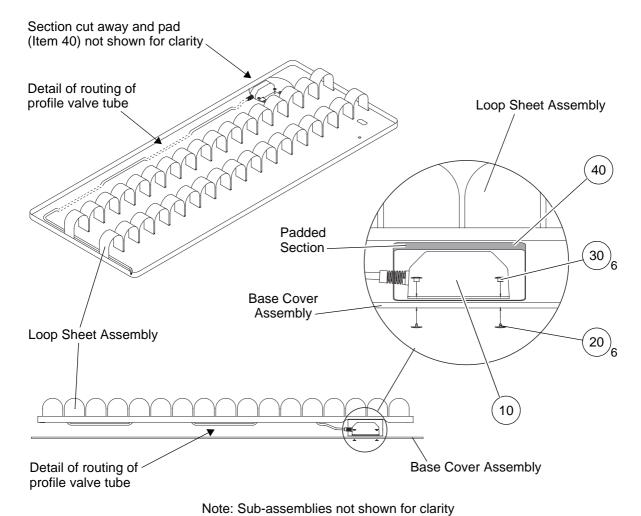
Replacing the Profile Valve Main Assembly (All variants except USA)
